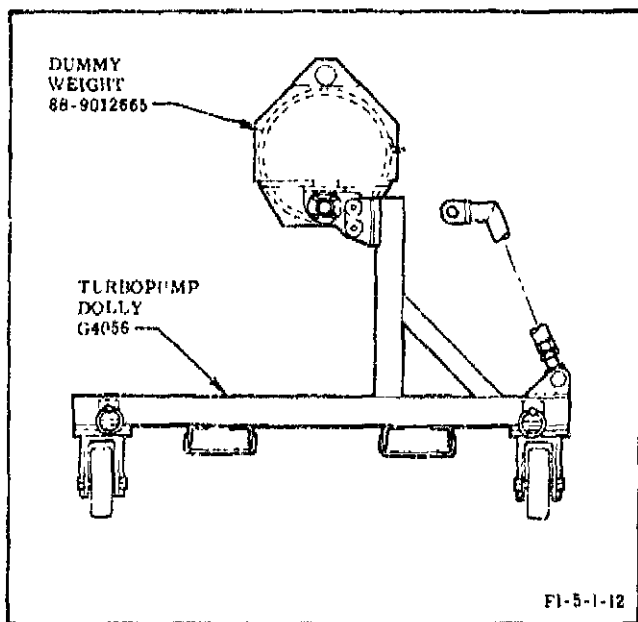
Recommended Proof-Test Setup for Turbopump Dolly
